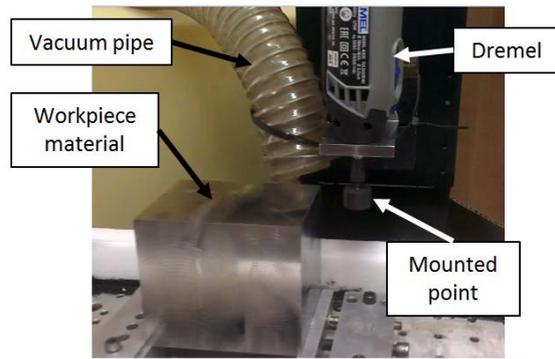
Titanium alloy workpiece material clamped in position with mounted point securely fixed in the Dremel.
